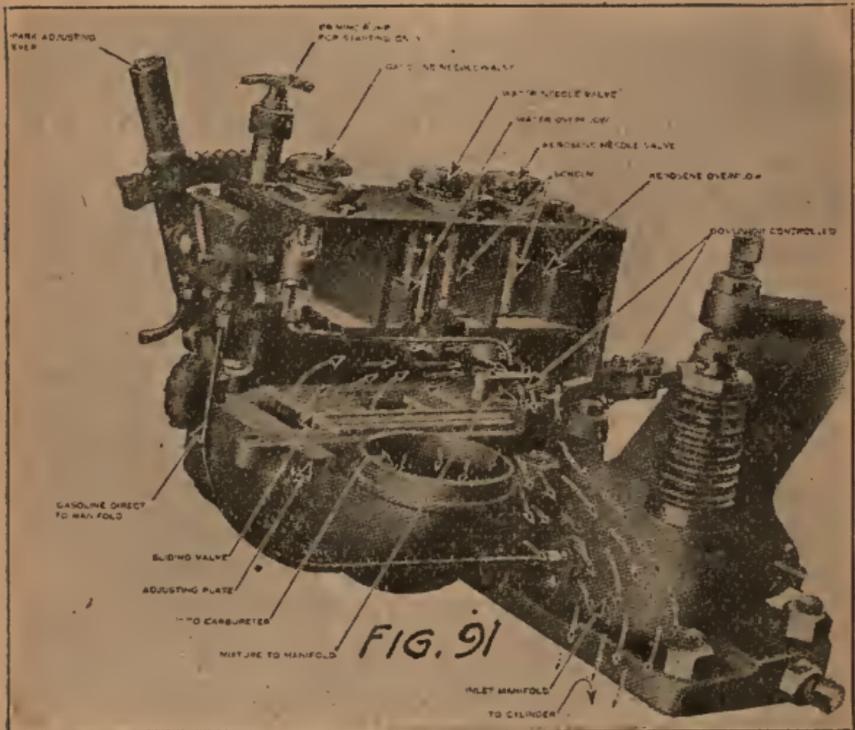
Secor-Higgins carburetor, another automatic type used by Rumely.
